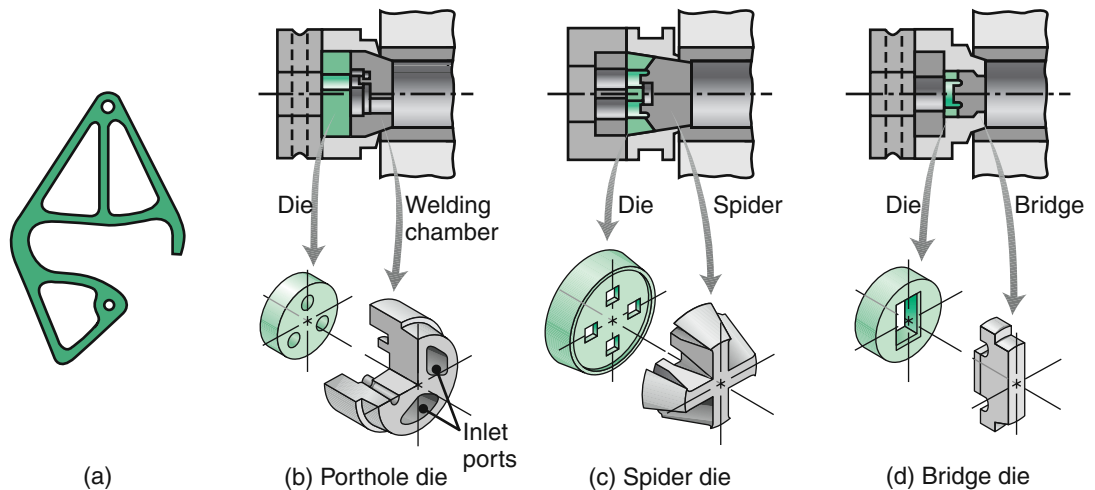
(a) An extruded 6063-T6 aluminum-ladder lock for aluminum extension ladders. This part is 8 mm (5/16 in.) thick and is sawed from the extrusion (see Fig. 15.2). (b) through (d) Components of various dies for extruding intricate hollow shapes. Source: (b) through (d) after K. Laue and H. Stenger.
